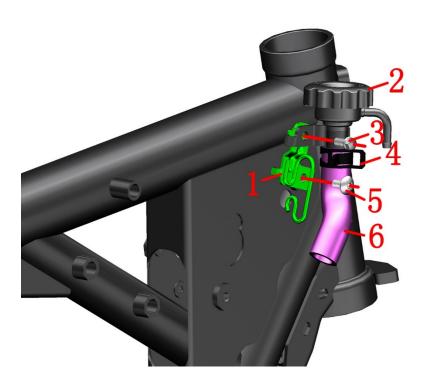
C0	OOLING SYSTEM	Water tank assembly 2	CHK
